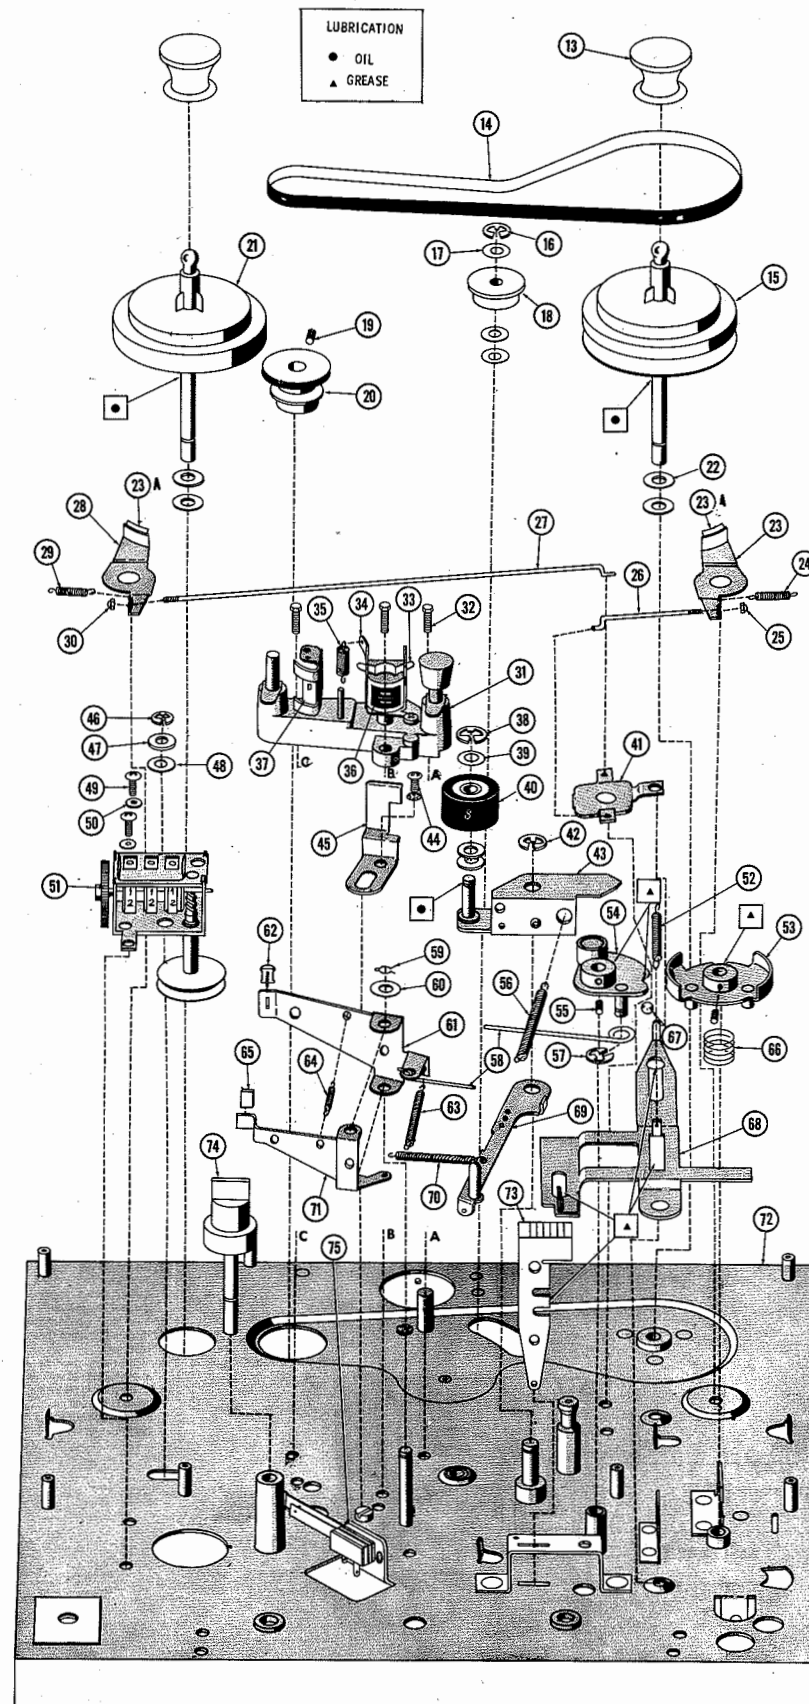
A EXPLODED VIEW OF PARTS ABOVE BASEPLATE
